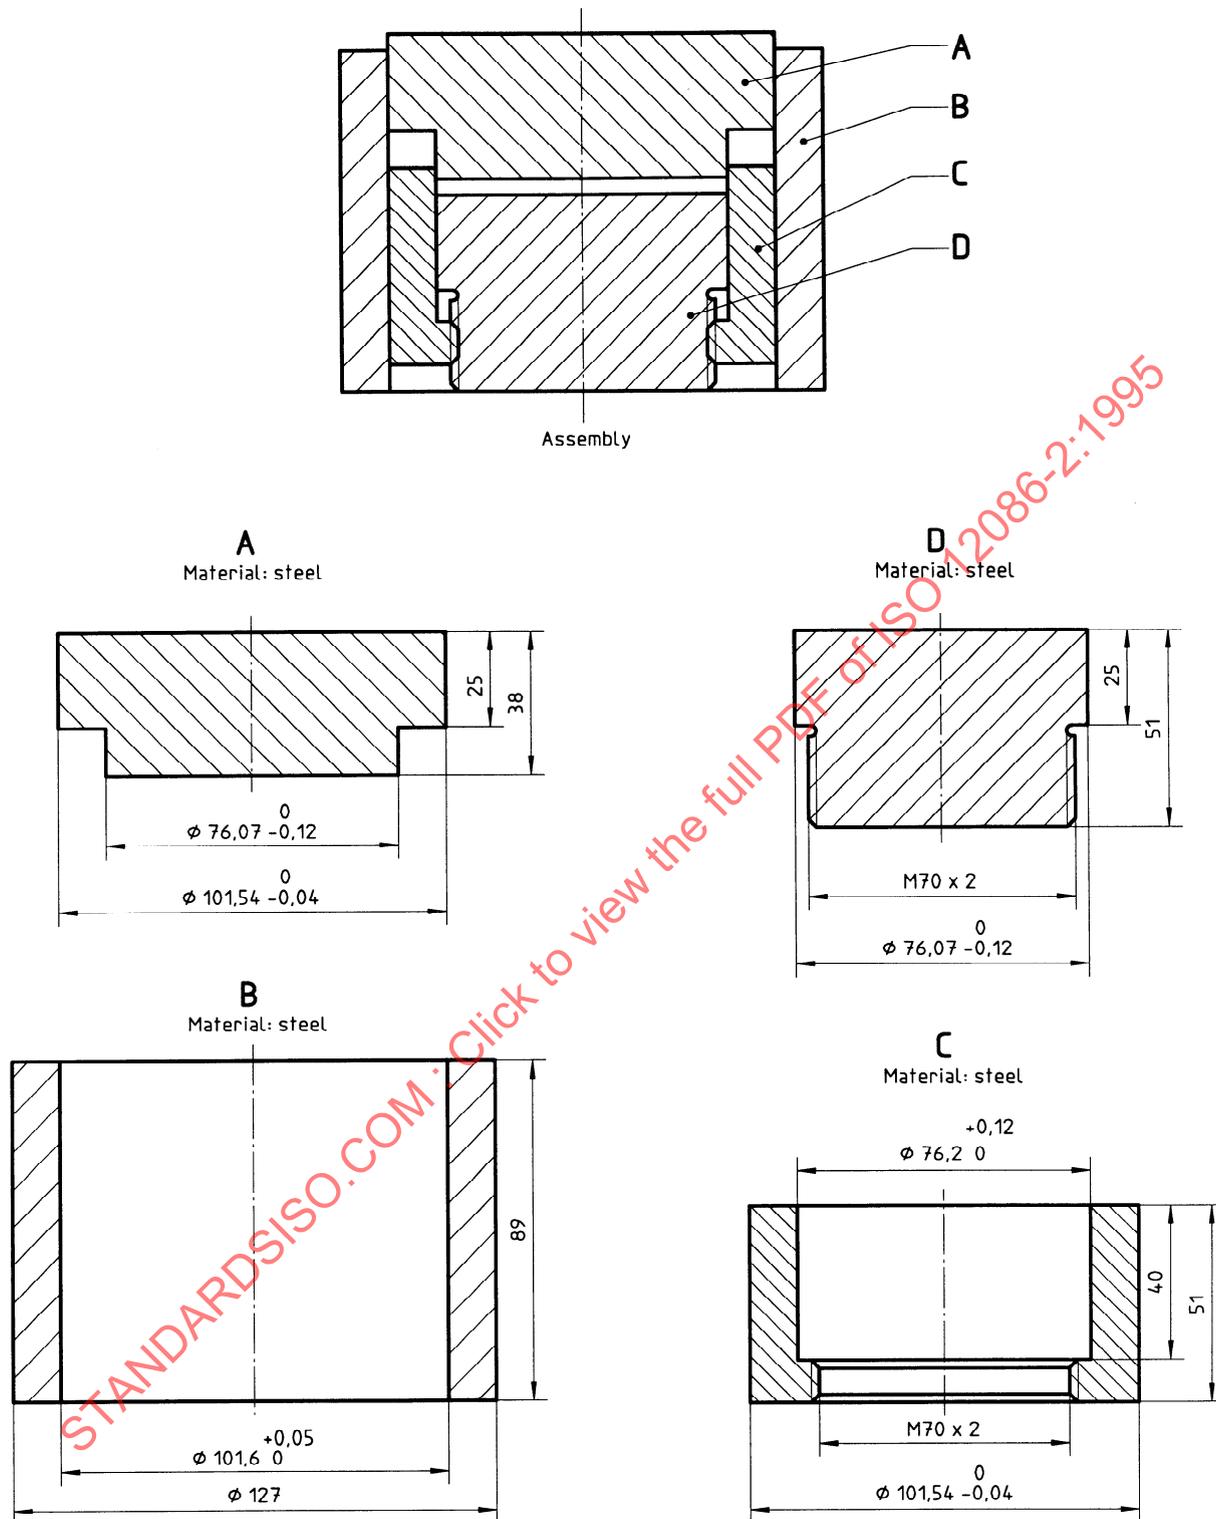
Mould assembly for preparation of specimens for the determination of tensile properties
